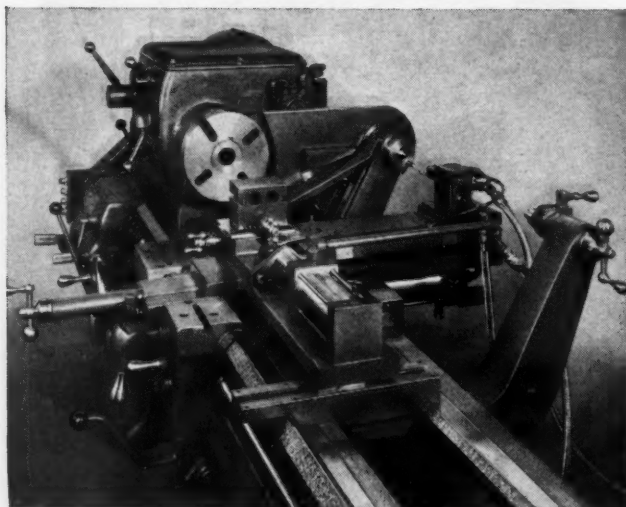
Duplicating Mechanism of Springfield Profiling Machine Set up for Use with Cross-feed
